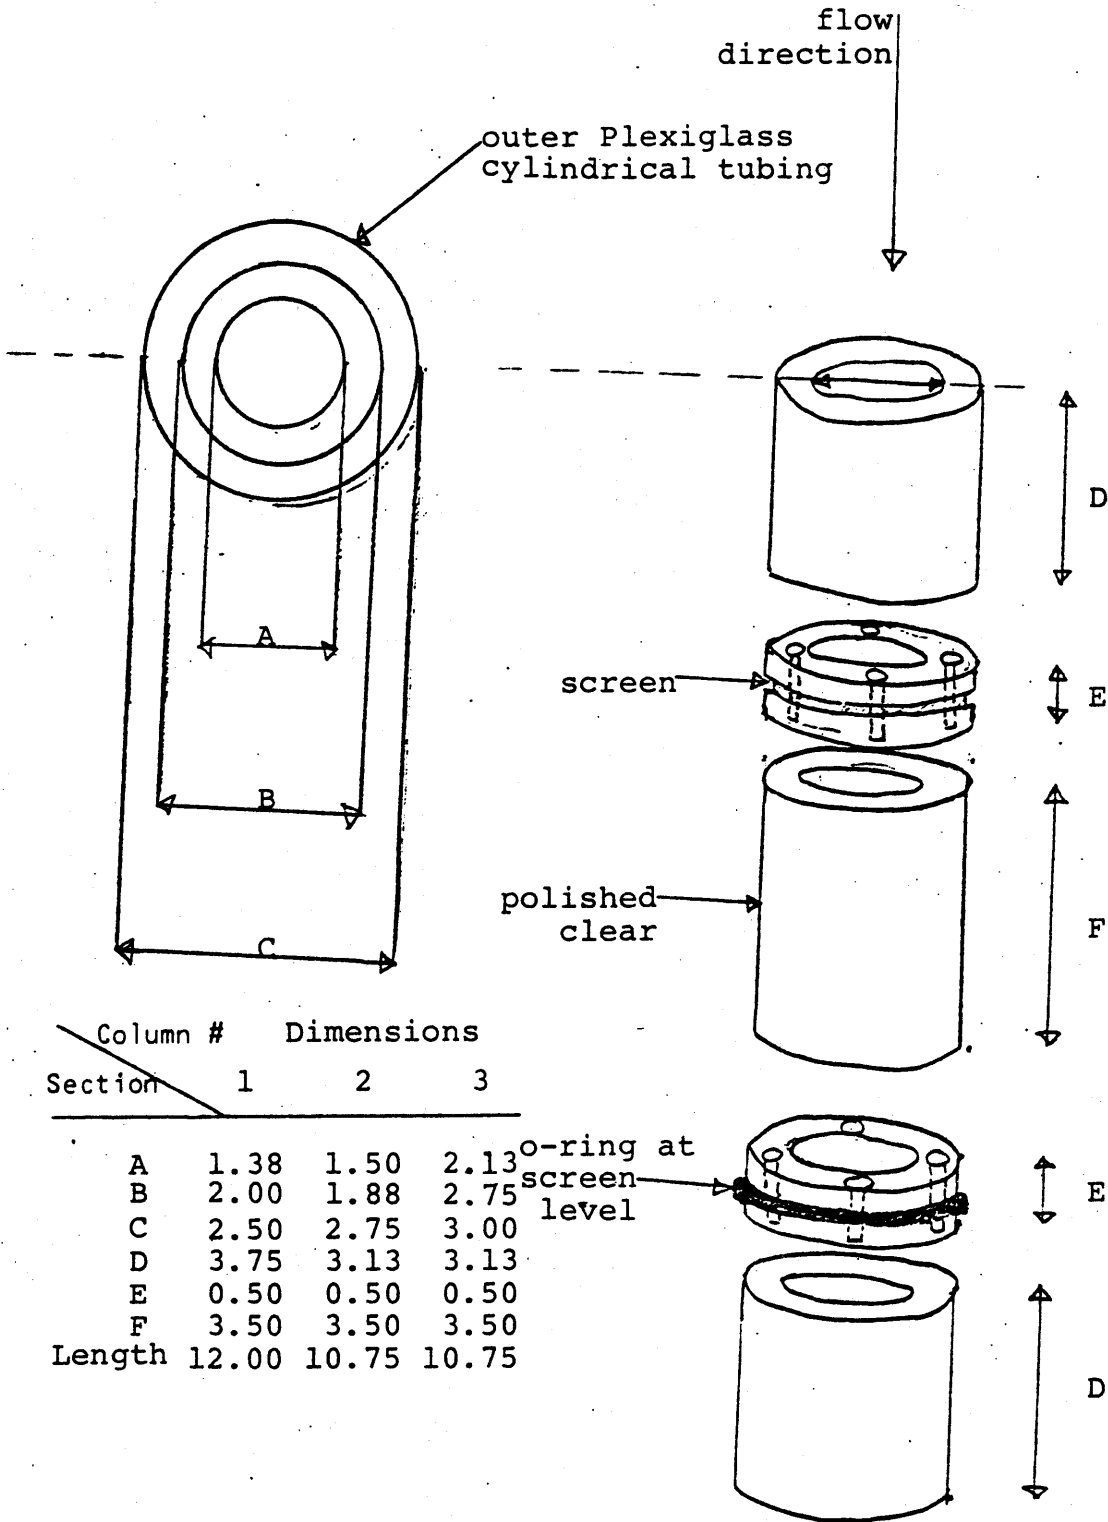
Schematic of Plexiglass Ion-Exchange Column Section (All dimensions in inches)
